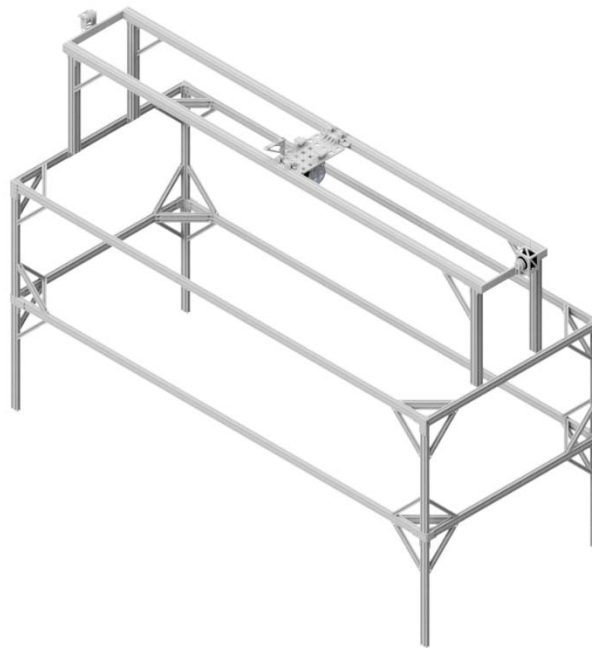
Isometric view of the linear motion test fixture CAD model. The timing belt and cable carrier are not shown.
